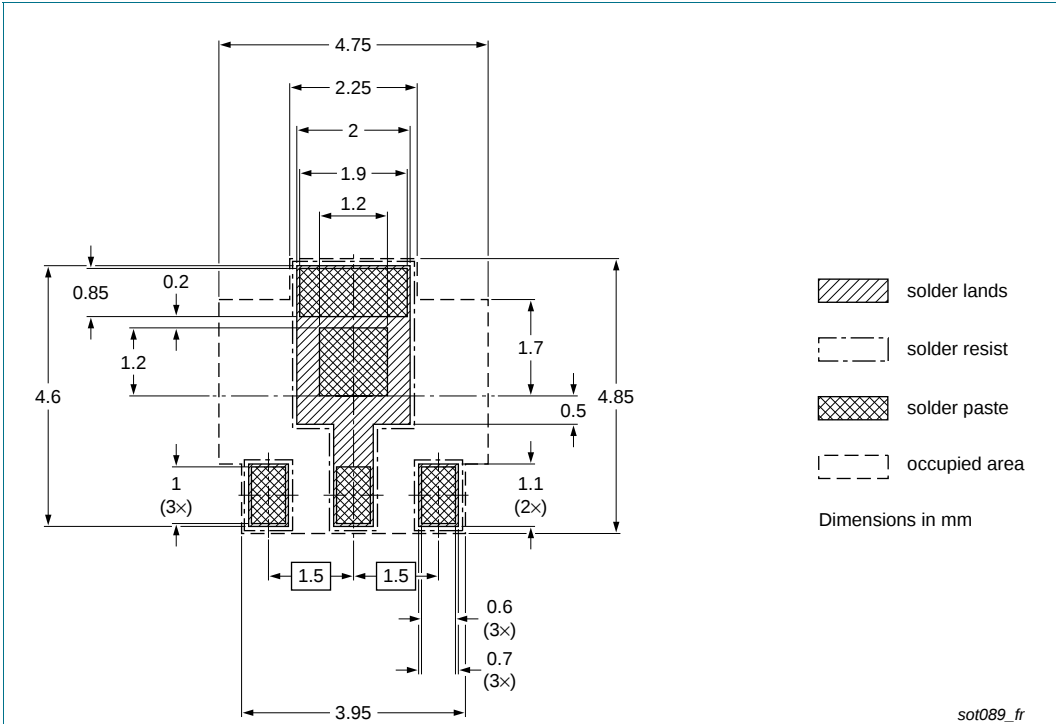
Reflow soldering footprint SOT89 (SC-62/TO-243)
